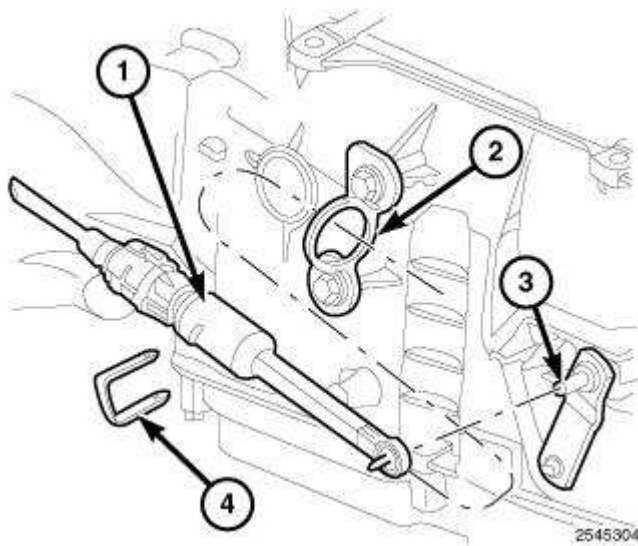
Identifying Gearshift Cable, Eyelet & Manual Shift Lever
